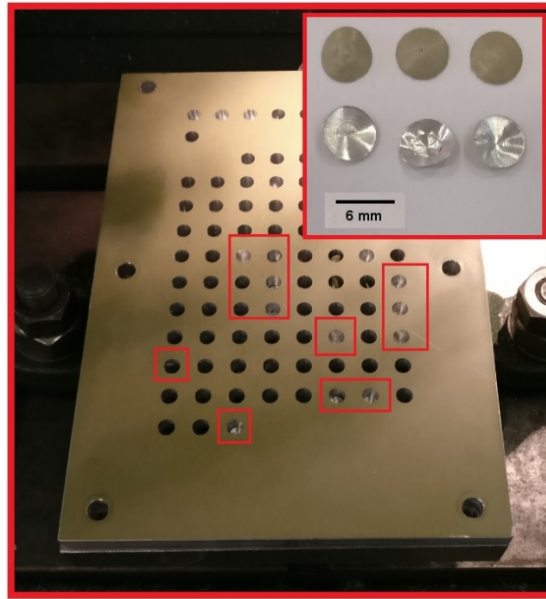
GLARE® workpiece showing formed burr caps after the drilling process
